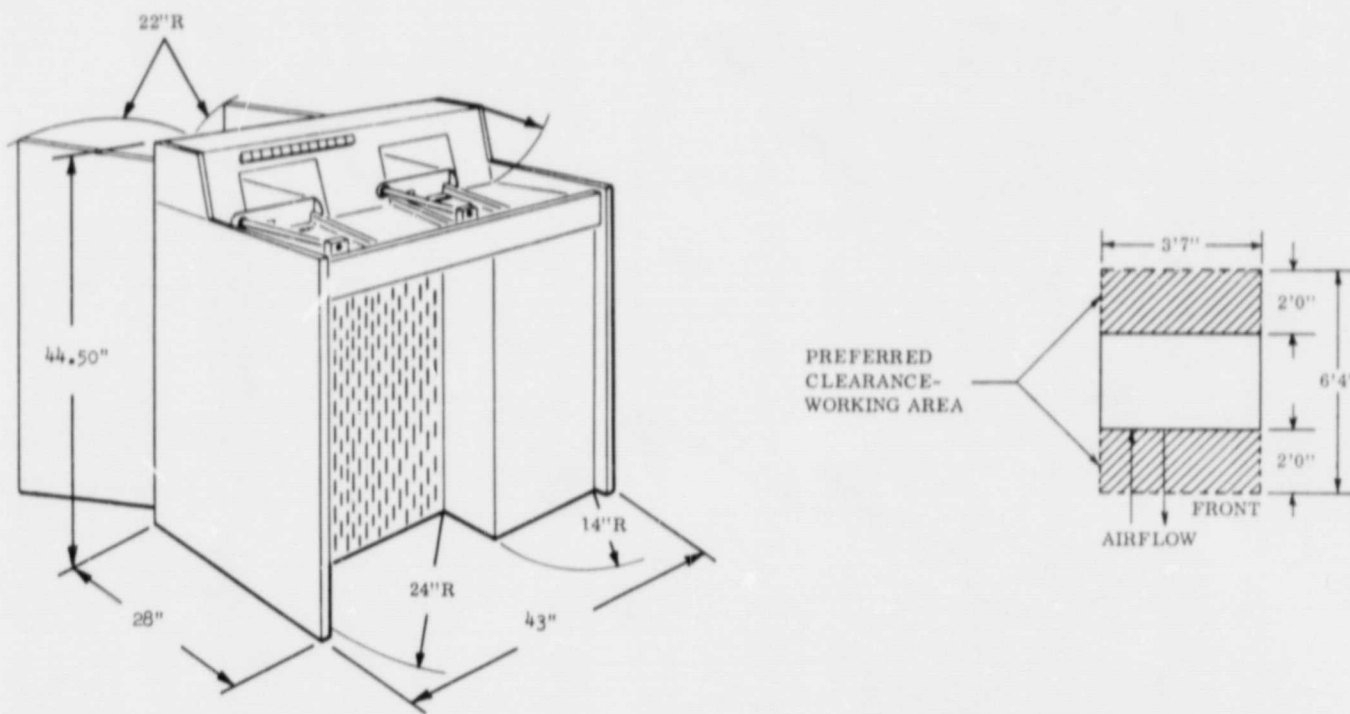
Outline and Installation Dimensions, Line Printer Converter Unit (Unit 1301)
